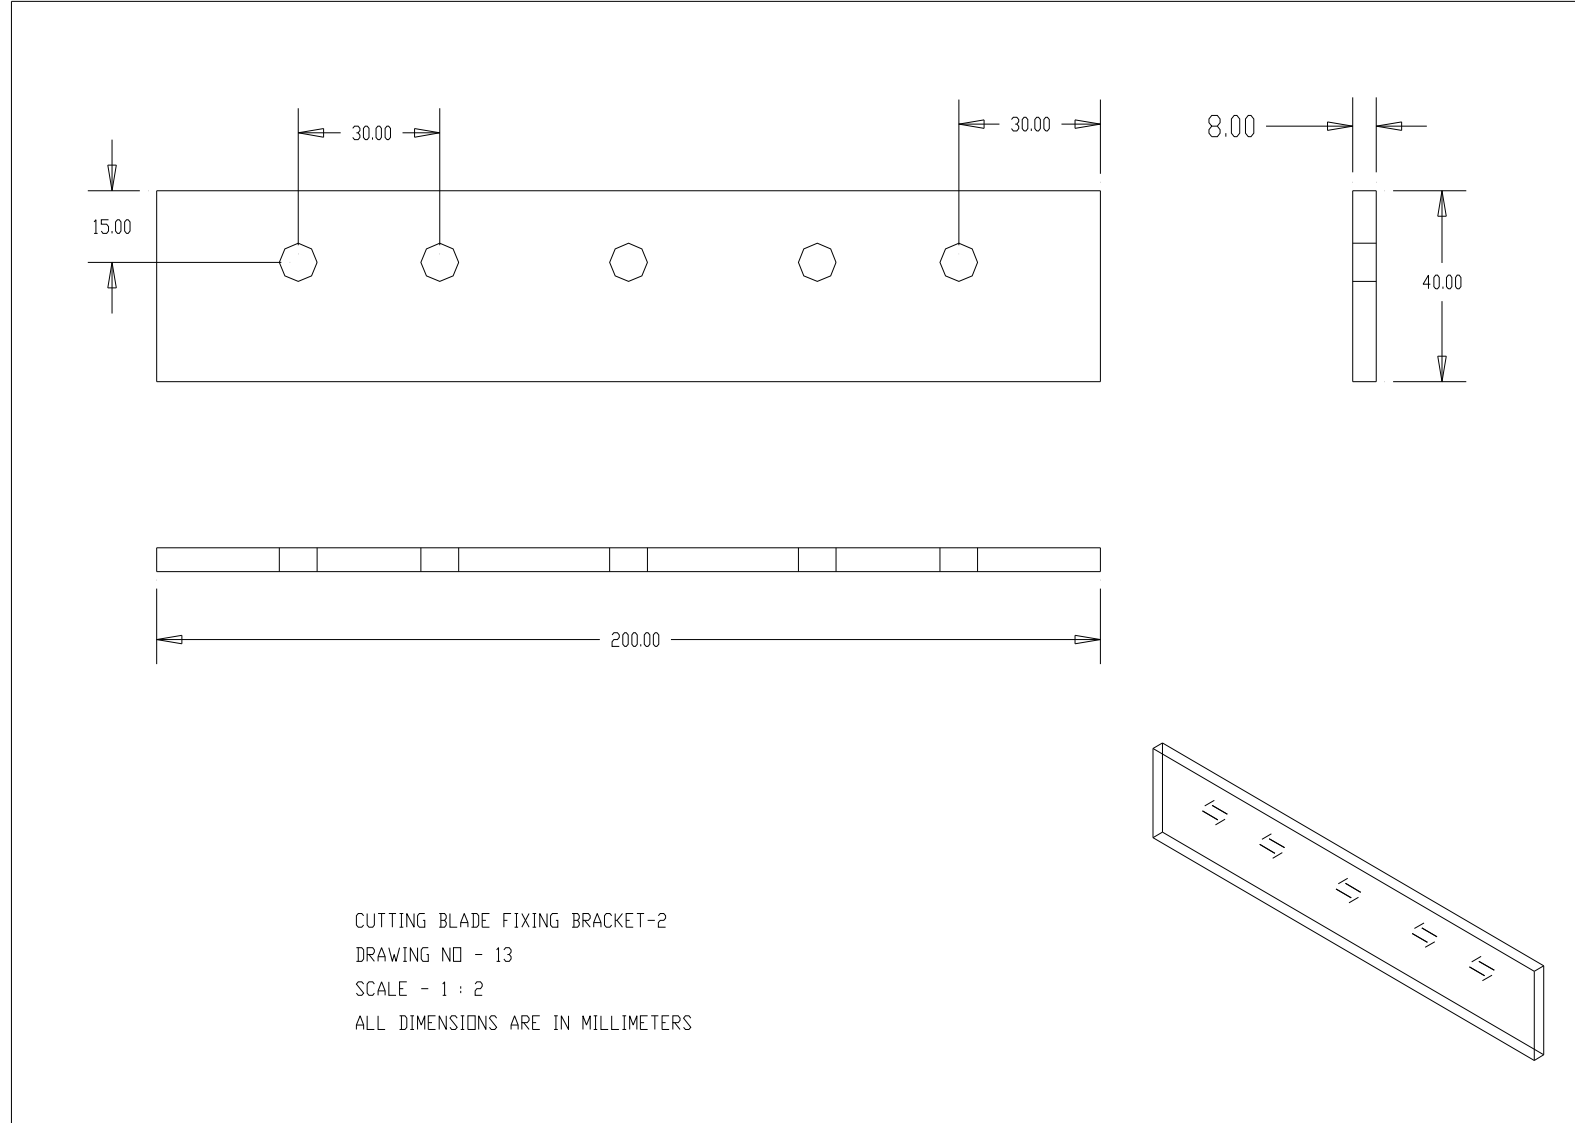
Detailed drawing of cutting blade fixing bracket-2
